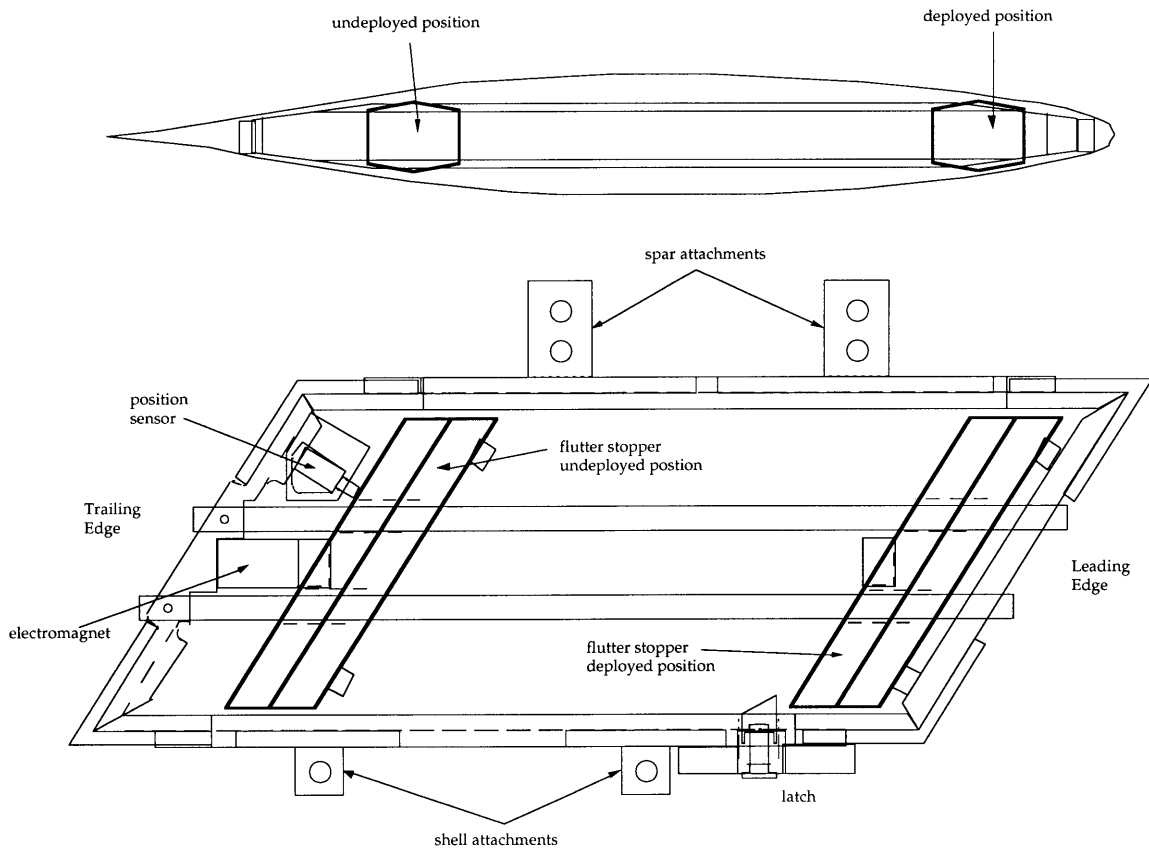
Cross-section and top view (assembly drawing) of the flutter stopper
